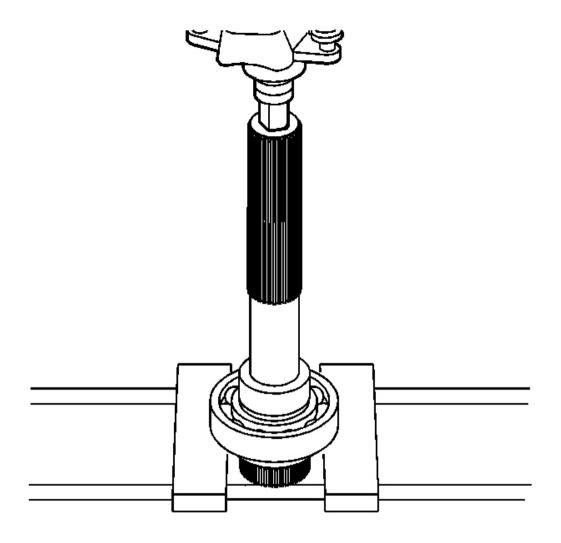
Removing Rear Output Shaft Bearing By Using Hydraulic Press Courtesy of GENERAL MOTORS CORP.
